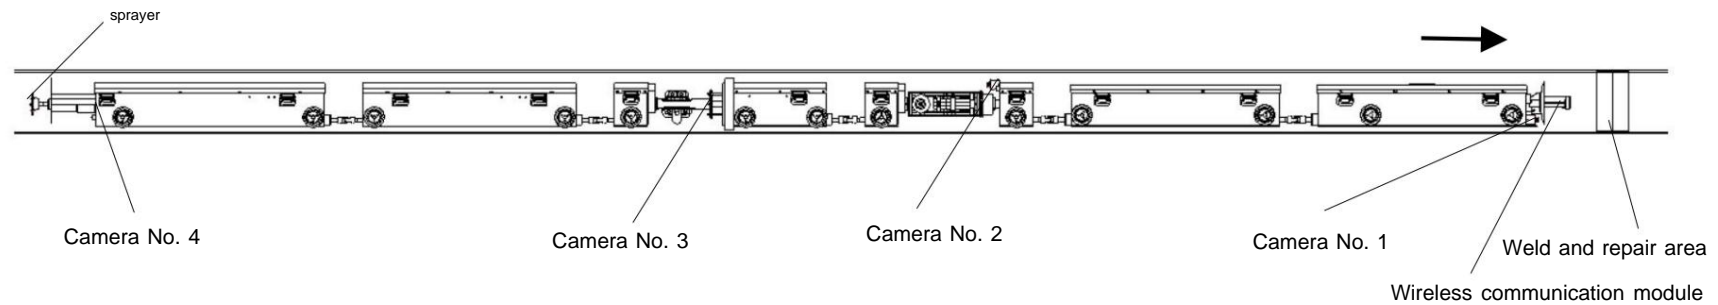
Explanation: The internal welding robot enters the pipeline and moves forward along the pipeline. When camera 1 detects the weld seam, the operator will also see it on the monitor of the control box. Continue forward along the weld seam. When camera number 2 detects the weld seam, the operator presses the stop button on the control box, slowing down the robot's speed. (The robot will then be observed through the camera.) The video shows the operator aligning the grinding brush with the weld seam, initiating the grinding and rust removal program. Once the grinding program is complete, the machine automatically stops and returns to its original state. The operator initiates the forward program, and the robot continues to move forward. When camera number 3 detects the weld seam, the operator presses the stop button on the control box, reducing the robot's speed. Set the speed to slow. The operator, using a camera, aligns the suction head with the weld seam and starts the vacuuming program. Once the vacuuming program is complete, the machine automatically stops and resumes normal operation. Return to the original state. The robot continues to move forward, and when camera number 4 sees the weld, it starts the spraying program to cover the weld and its repair area.
